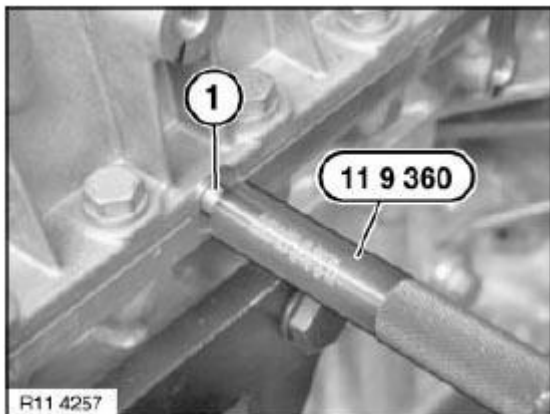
Identifying Nozzles With Special Tool (11 9 360)
